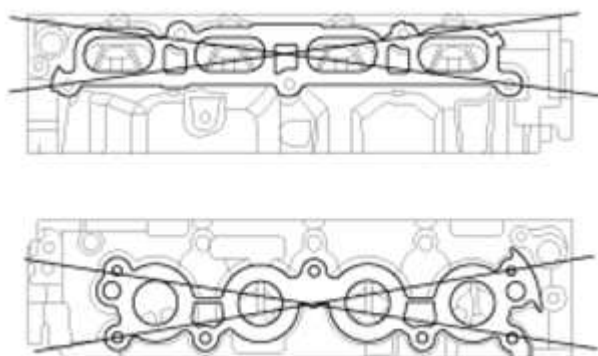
Checking Flatness Of Manifold Mounting Surface
